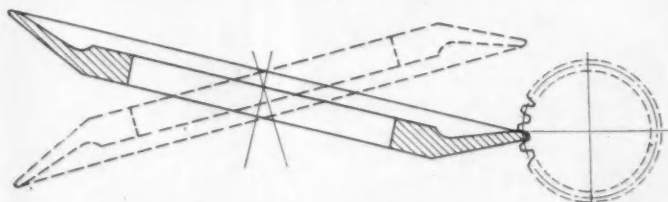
SKETCH ILLUSTRATING THE REVERSIBLE AND SWIVELING FEATURES OF THE WHEEL
